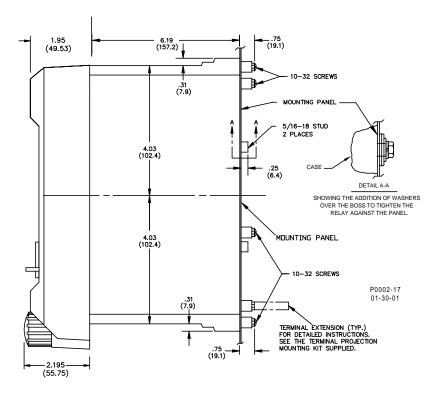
S1 Case, Double-Ended, Projection Mount, Outline Dimensions, Side View
